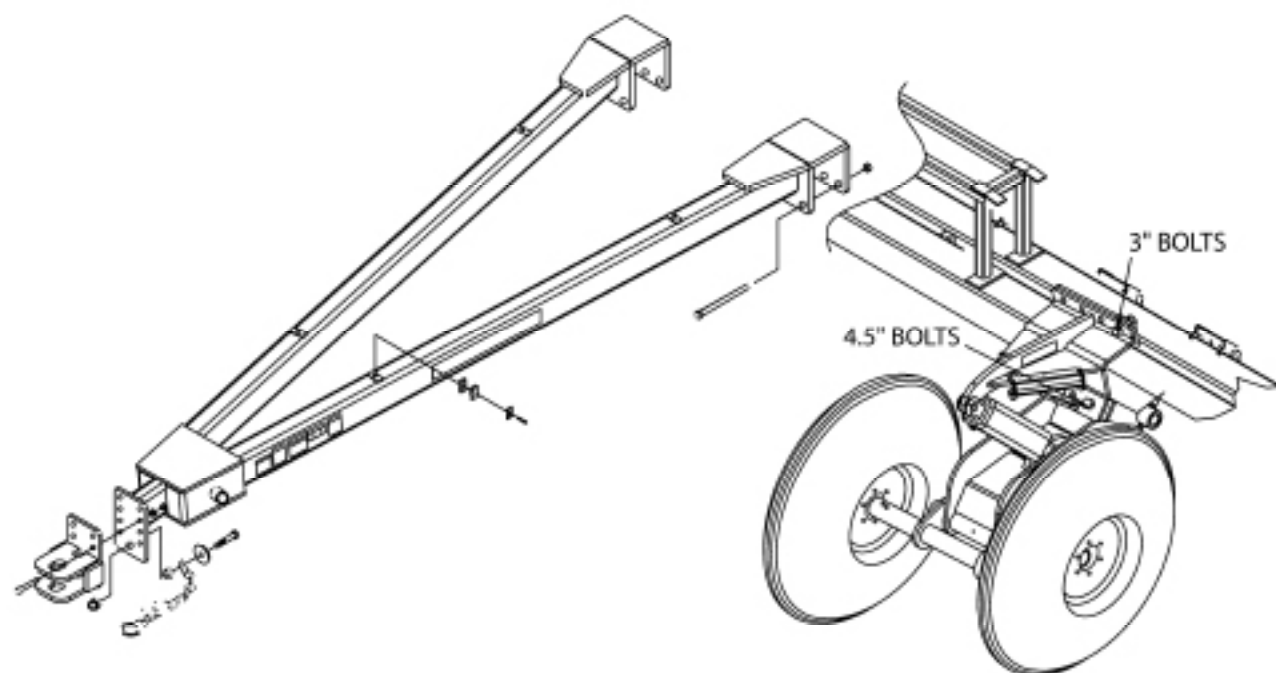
Pull-Type Hitch and Wheel Mast Assembly
